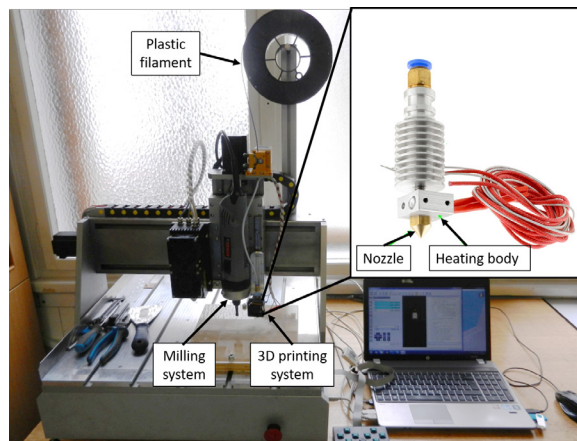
Machine for hybrid manufacturing consists of 3D printing (FDM) and milling systems [1]
